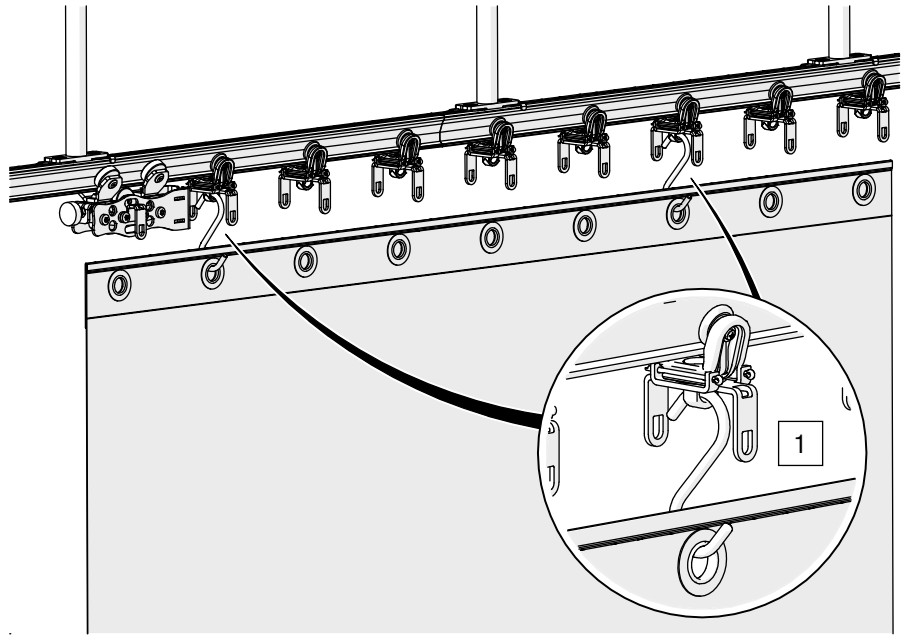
Inner layers – Pre-position with mounting material (e.g. S-hook)
